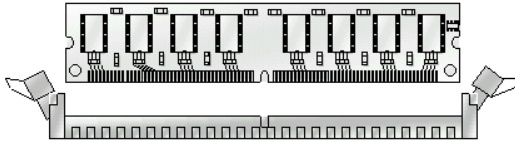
DDR2 DIMM Memory and 240-pins Socket
